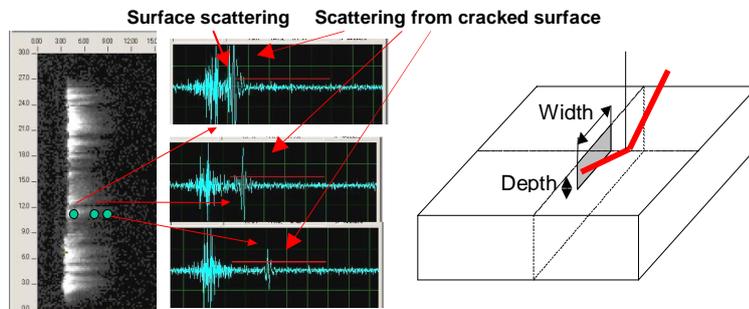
Fatigue crack surface image. Transducer :10MHz, F=100mm.
